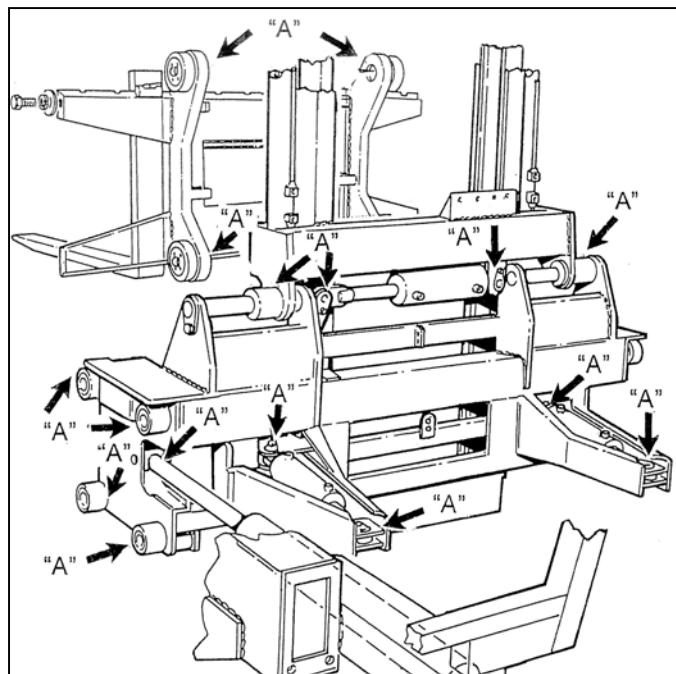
Mast / Forks Carriage, Tilt and Side Shift
